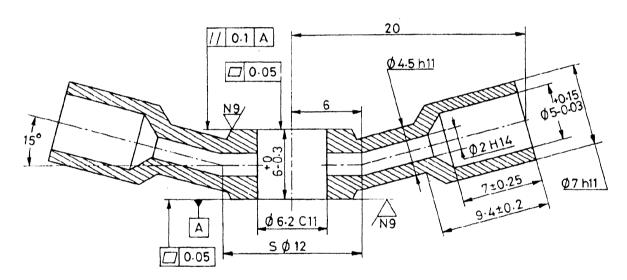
Dimensions and Tolerances of Bent Type Double Ended Pipe Union
